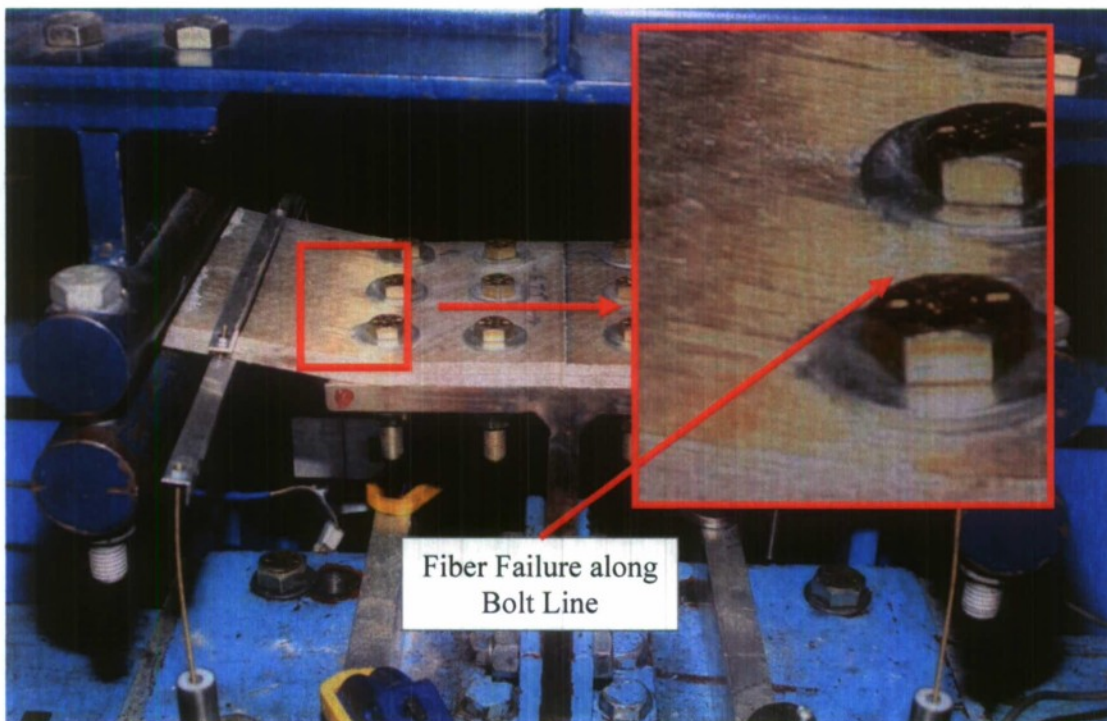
48-Ply Bolted Joint 6kip Fatigue Test Failure Photos
